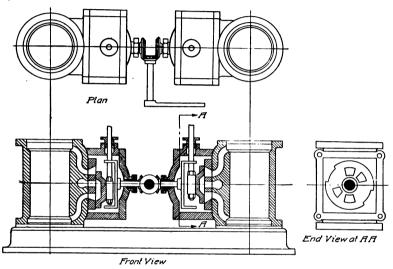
Front Section, Plan, and End View of Miller Steam Valve
